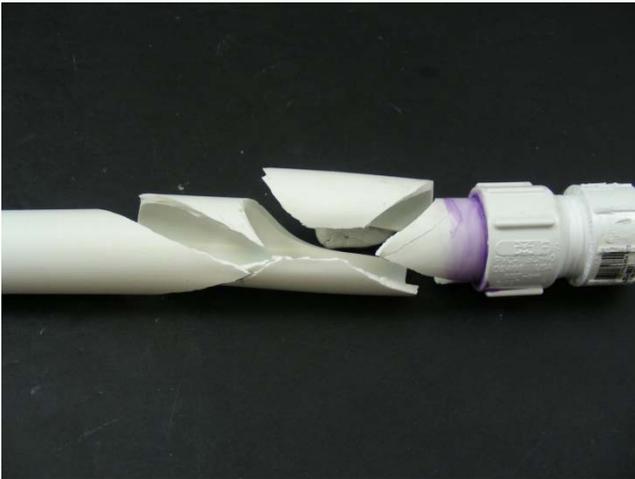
Close-up view showing the crack pattern on the PVC pipe.
